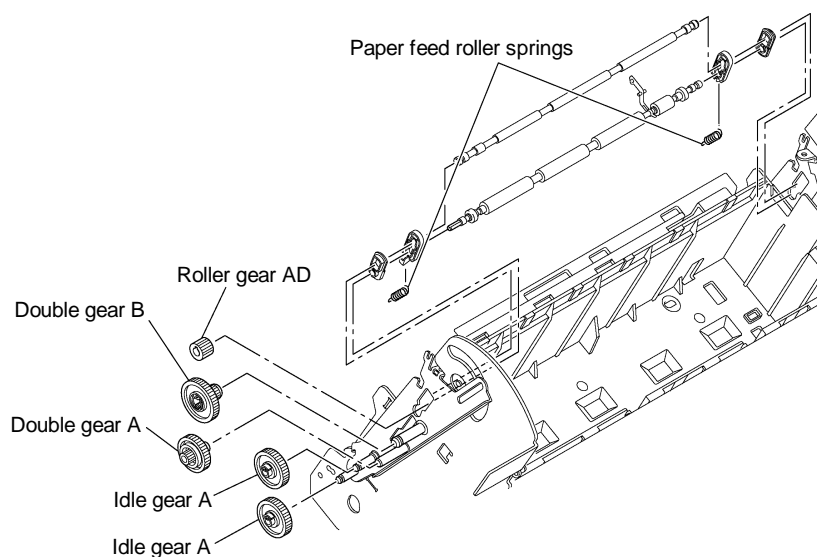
Removing the Paper Feed Holder Assy
